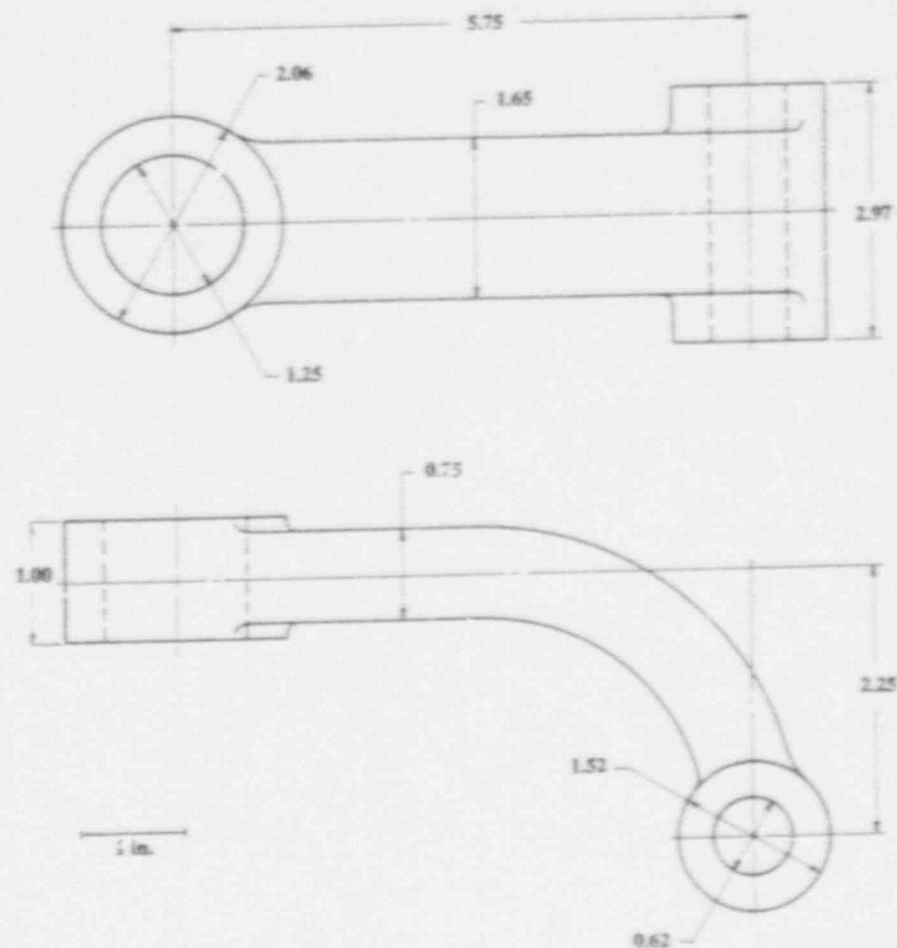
SAMPLE NO. 243, 8-INCH CHECK VALVE. Dimensions in inches. Diagram is schematic.
